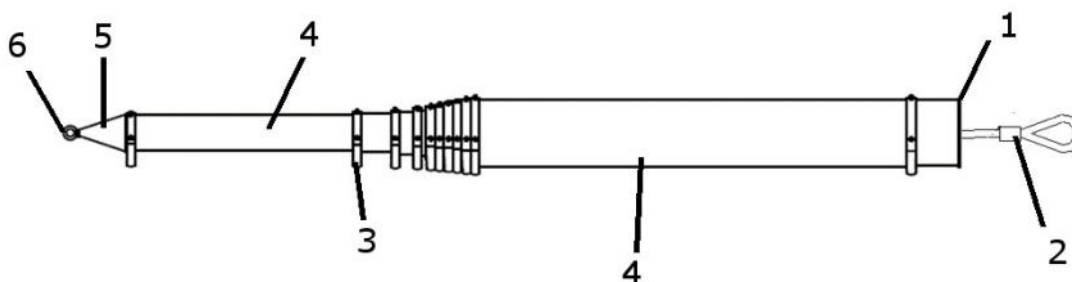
TAS example: 1: vent connection with bead; 2: traction rope; 3: outer ring with foot; 4: single tubes of perforated sheet metal; 5: Active tip with 6: Drawbar eye for attaching the towing cable
